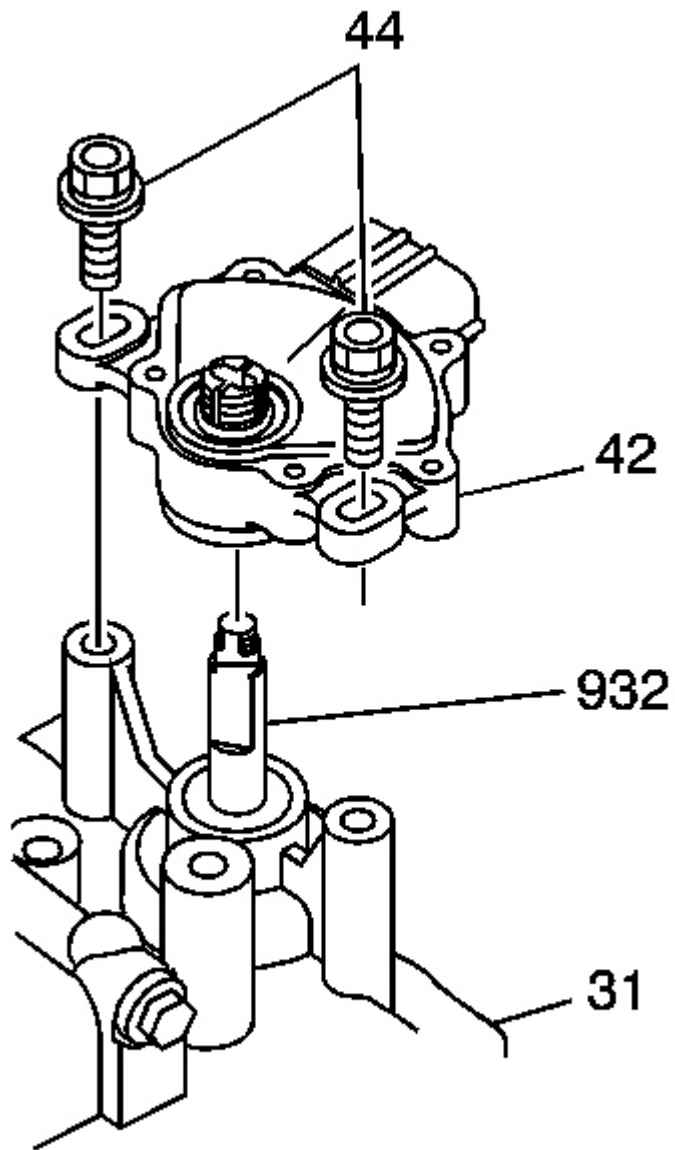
Park/Neutral Position Switch & Control Shaft Hole
